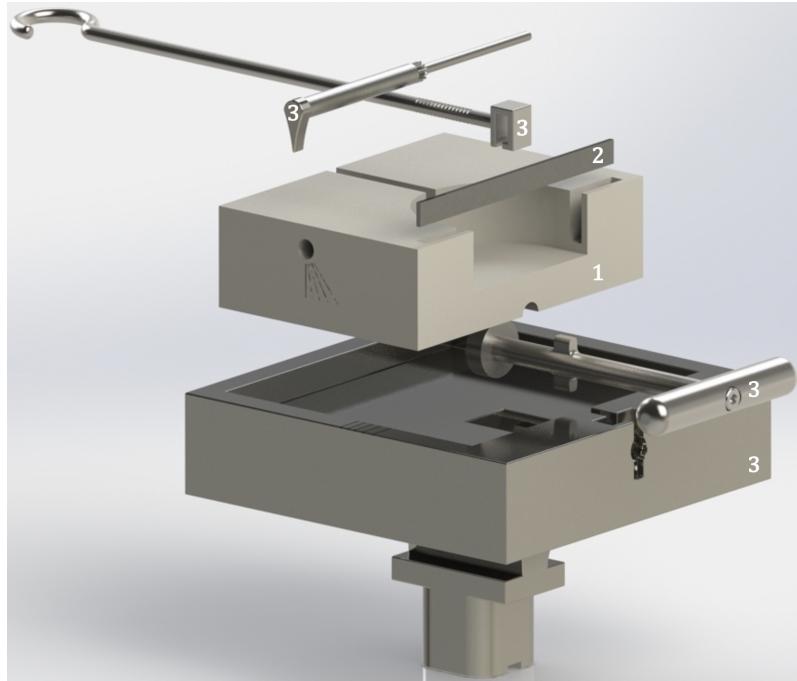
Solidworks image of the stiffness measuring device. Material 1: polycarbonate. Material 2: AISI 316 stainless steel sheet. Material 3: AISI 316L stainless steel.
